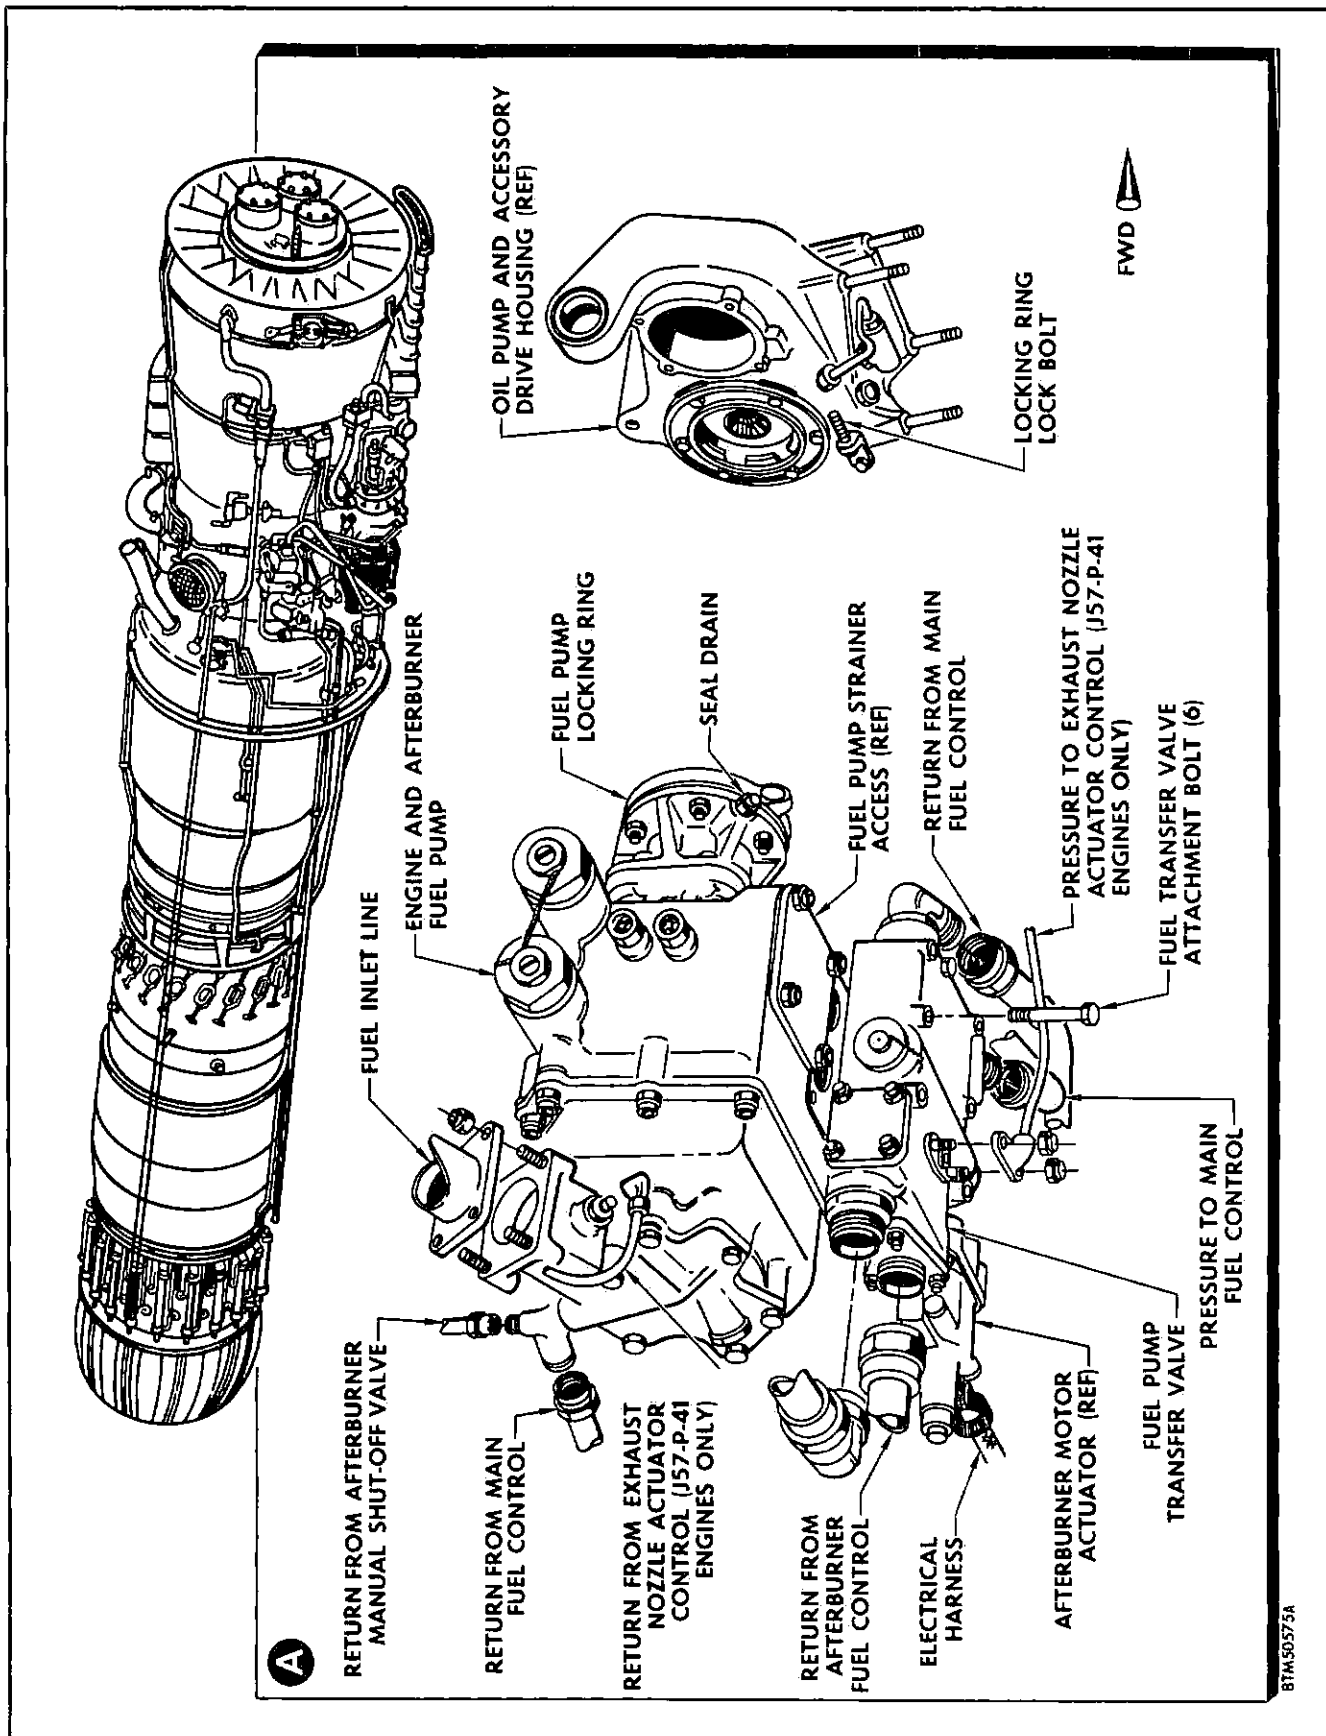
Engine-Driven Fuel Pump/Transfer Valve
